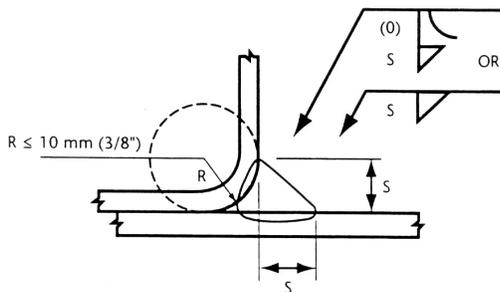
CSA W59 (2003), Figure 4.4, Flare Bevel Fillet Weld in a T-Joint (CSA, 2003).
